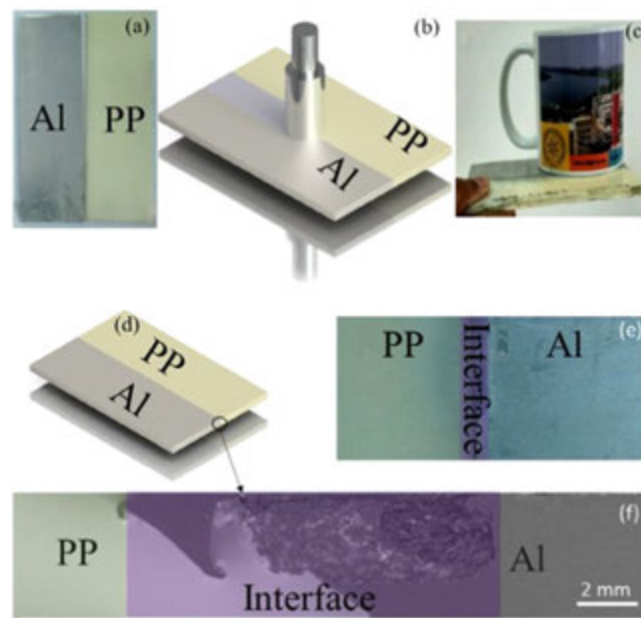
(a) Aluminum and Polypropylene workpieces before joining (b) Schematic diagram of FSW (c) Al and PP workpieces after FSW (d) Schematic diagram of Al and PP after FSW (e) Top view of dissimilar Al-PP joint (f) Cross-section view of Al and PP weld. Reproduced from Rout, A., *et al.*, 2019. Atomically locked interfaces of metal (aluminum) and polymer (polypropylene) using mechanical friction. *Polymer* 169 (1), 148–153.
